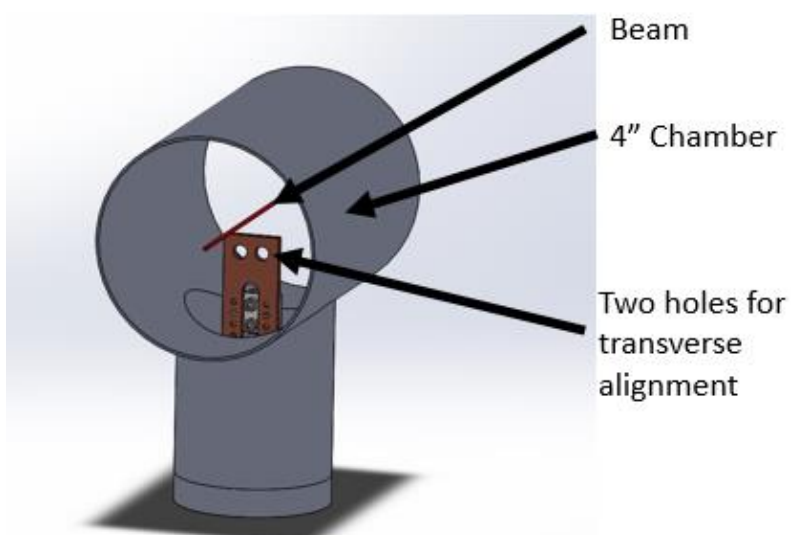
CAD drawing of the beam scraper connected to a manipulator arm installed in the vacuum chamber with the approximate location of the electron beam
